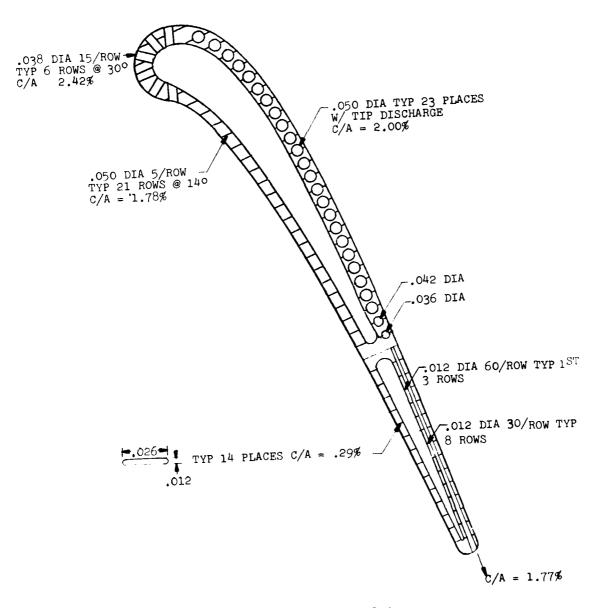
43.4% Reduced Solidity Crossflow/Impingement Design
